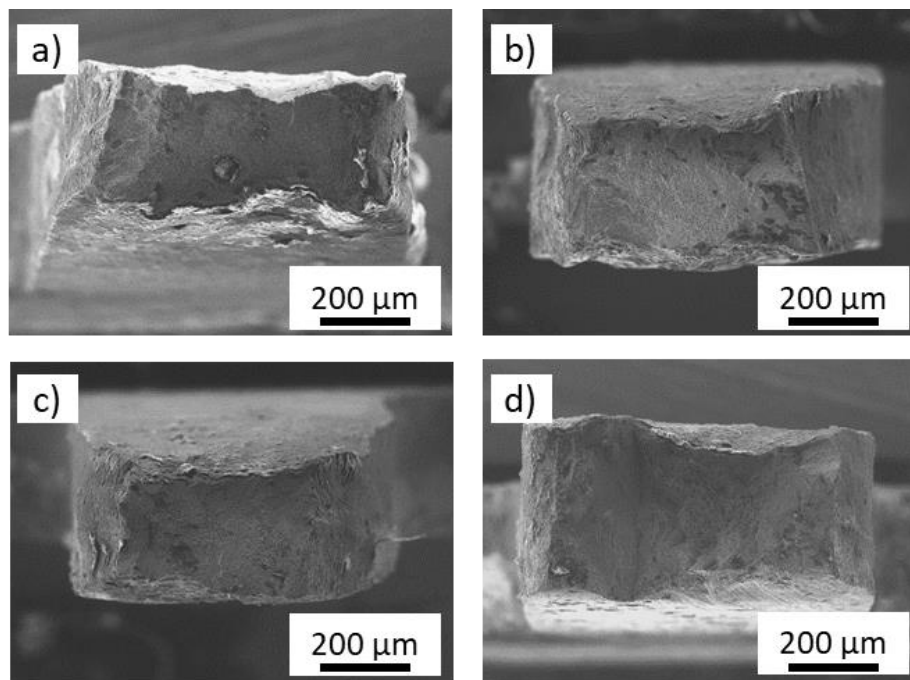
SEM images of MTT specimen's fracture surfaces for DIB, a) DIB15; b) DIB30; c) DIB45; d) DIB60.
